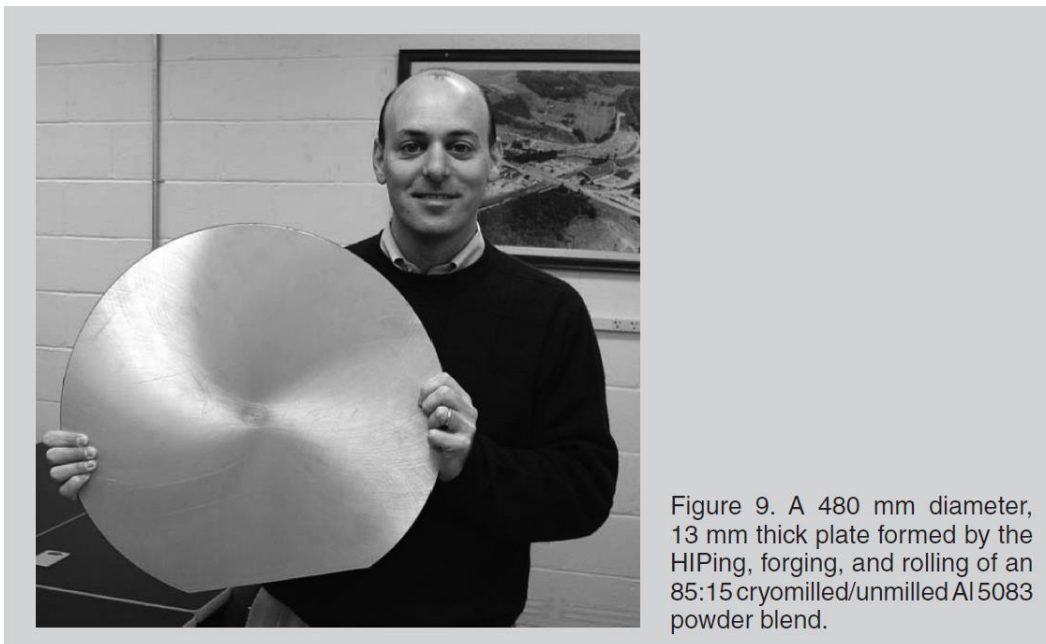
A 480 mm diameter, 13 mm thick plate formed by the HIPing, forging, and rolling of an 85:15 cryomilled/unmilled Al 5083 powder blend.
